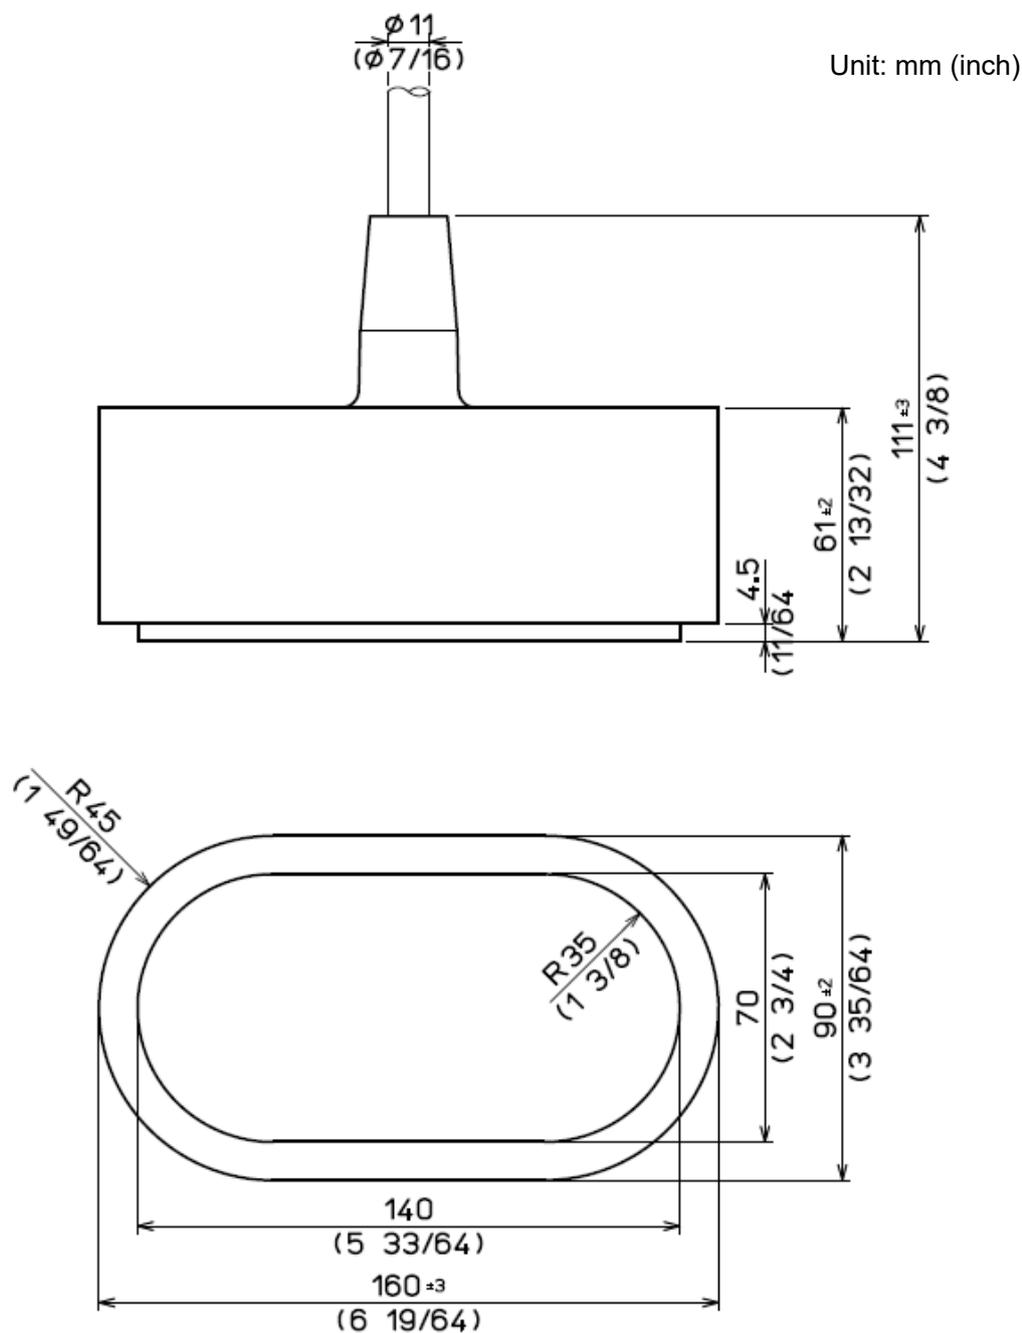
Outline dimensions of a transducer (TD-501C)
